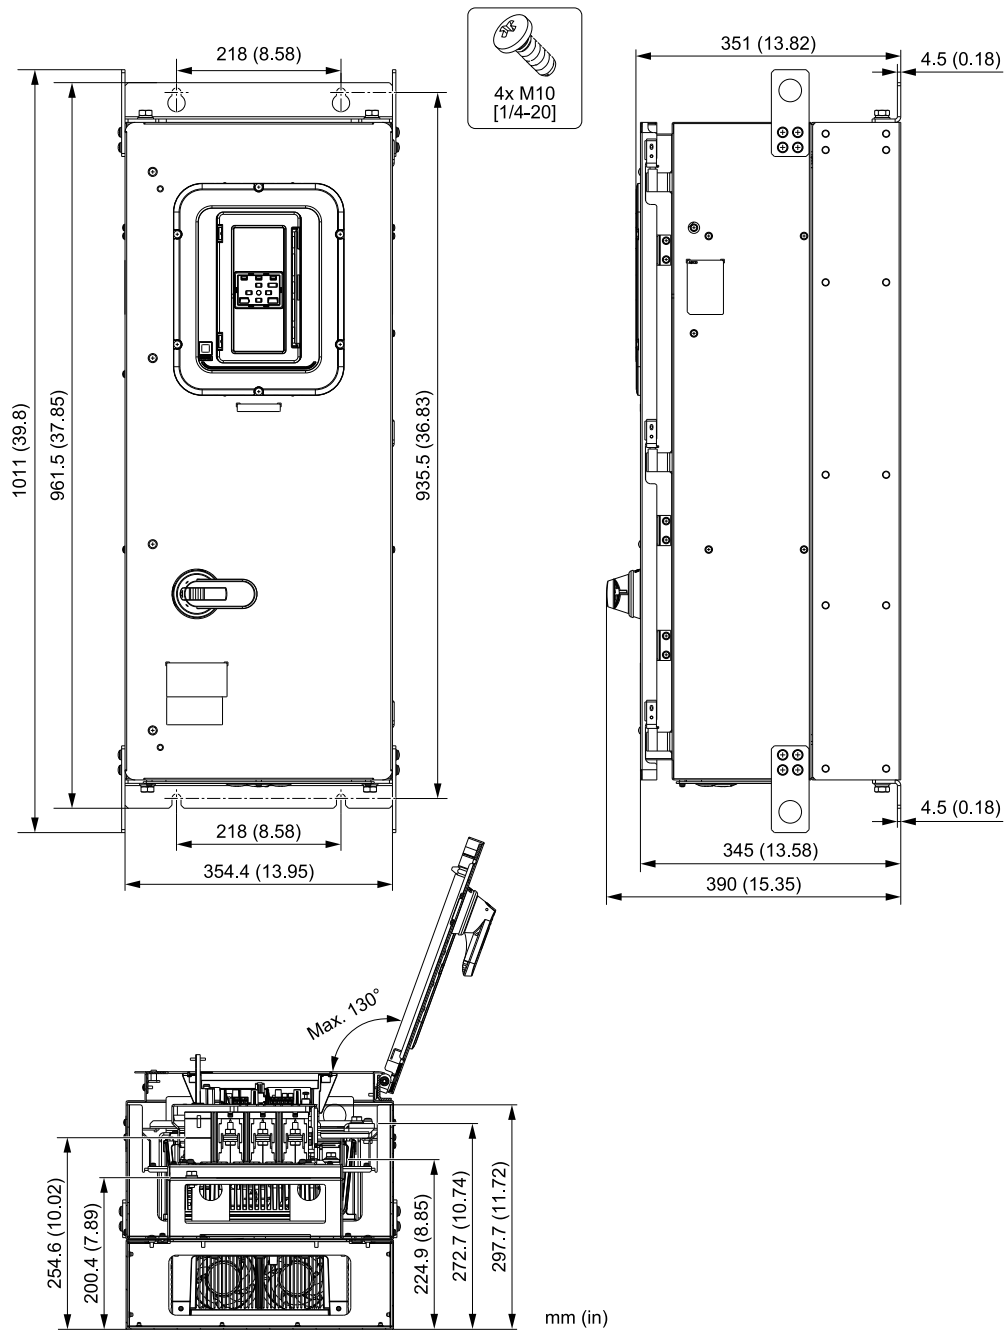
Exterior and Mounting Dimensions Diagram 6
